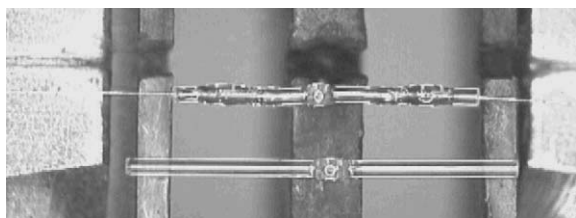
Photographs of a glass tube melted in its centre and used to make the wire-joints (bottom) and of a finished glass wire-joint (top).
